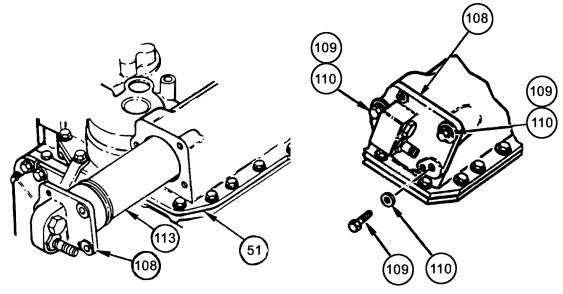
Oil Filter Head Assembly and Oil Filter Element
